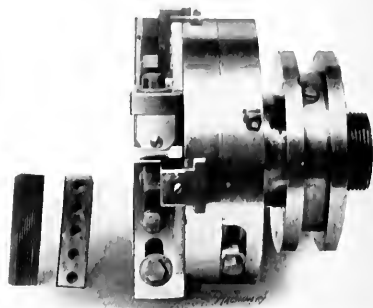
Die-head used on Victor Bolt and Pipe Threading Machine
